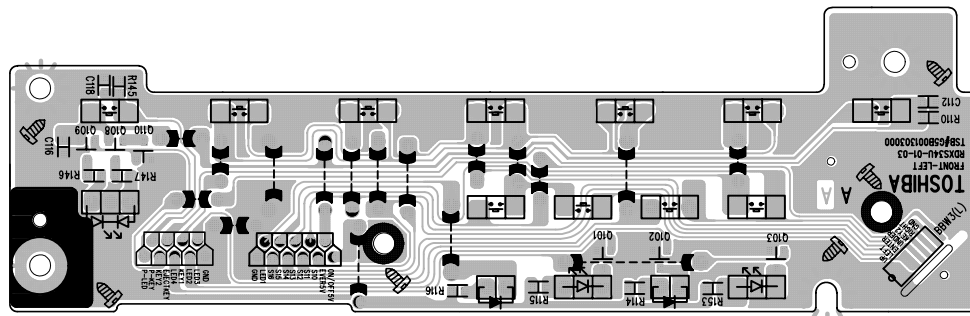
EU03B Front (L) PC Broad (Bottom side)
